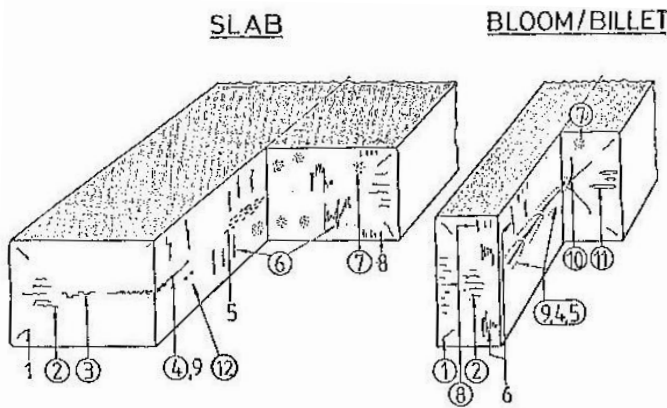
Internal defects in continuous cast steel slab: (1) Internal corner cracks (2) Side halfway cracks (3) Centerline cracks (4) Centerline segregation (5) Porosity (6) Halfway cracks (7) Non metallic inclusion clusters (8) Sub surface ghost lines (9) Shrinkage cavity (10) Star cracks diagonal cracks (11) Pinholes (12) Semi macro-segregation [8]
